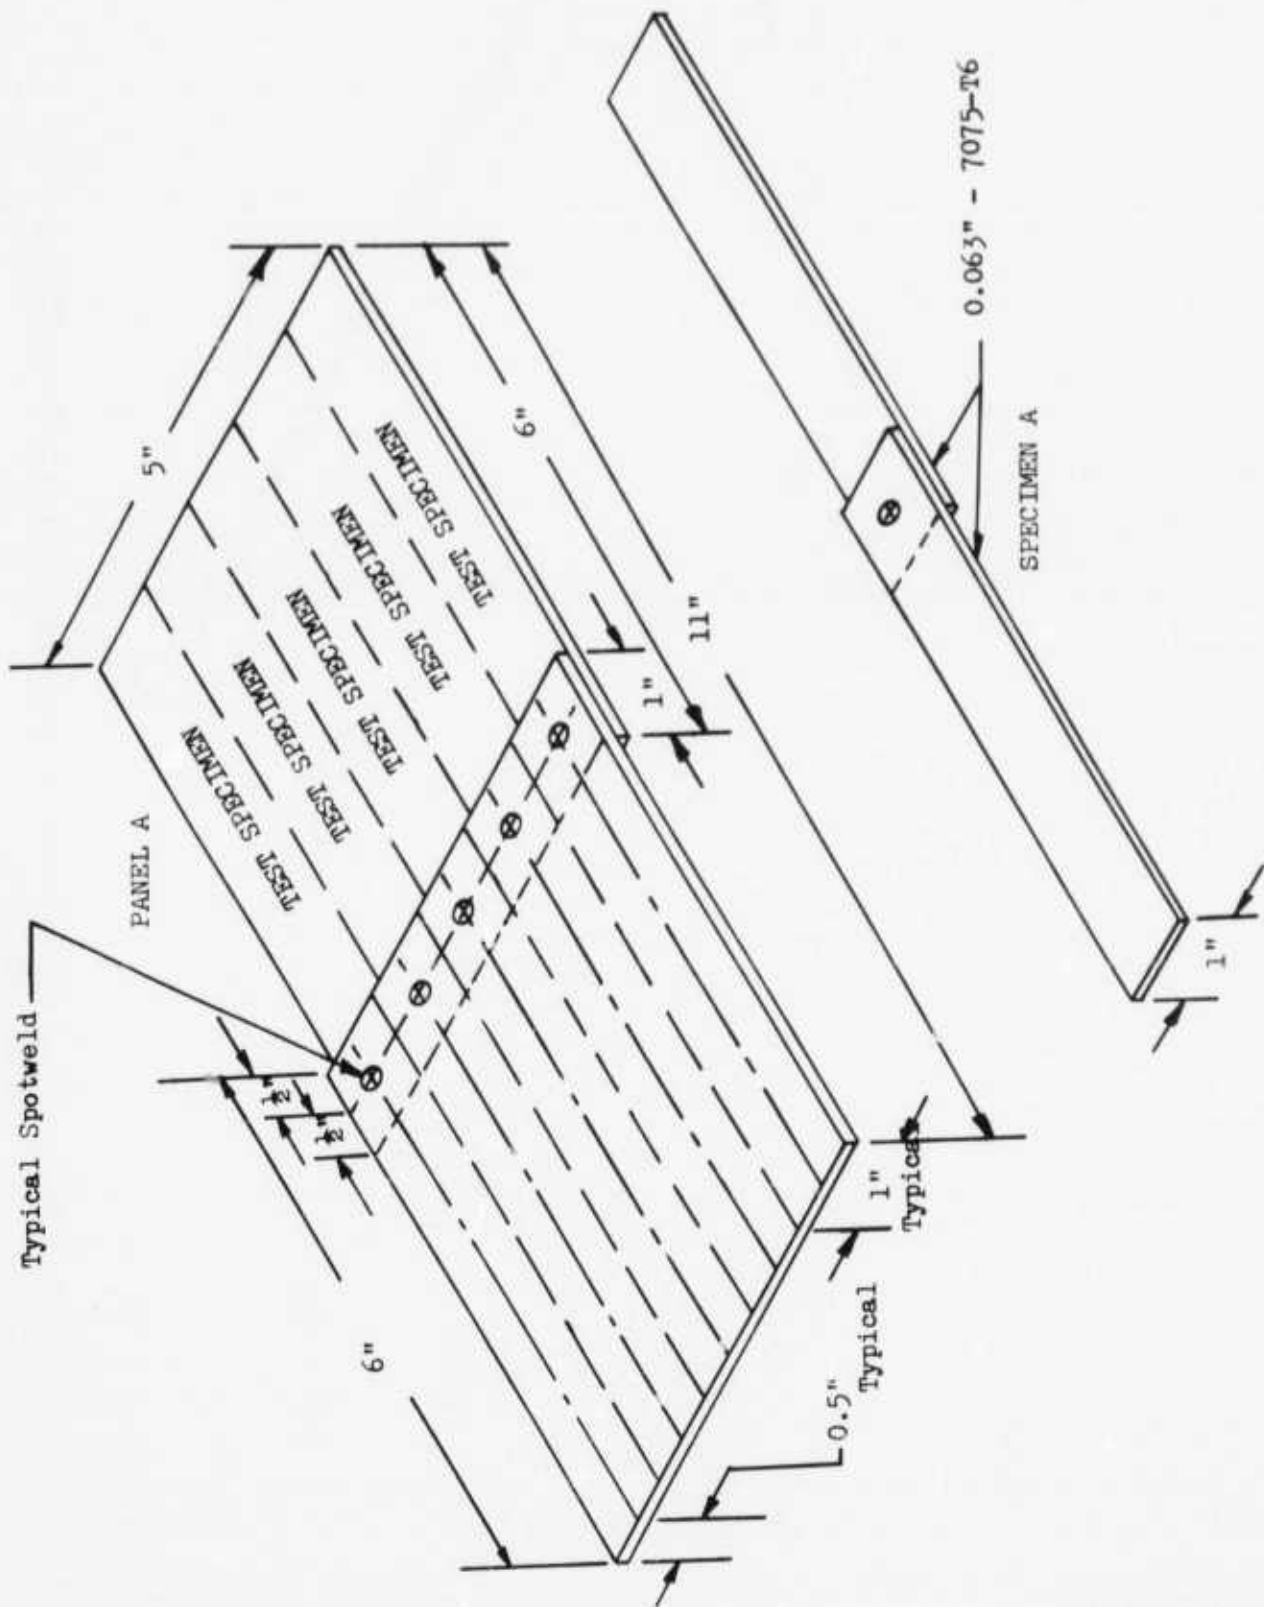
LAP SHEAR (W/SPOTWELDS) TEST PANEL AND TEST SPECIMEN FOR SPOTWELD -
